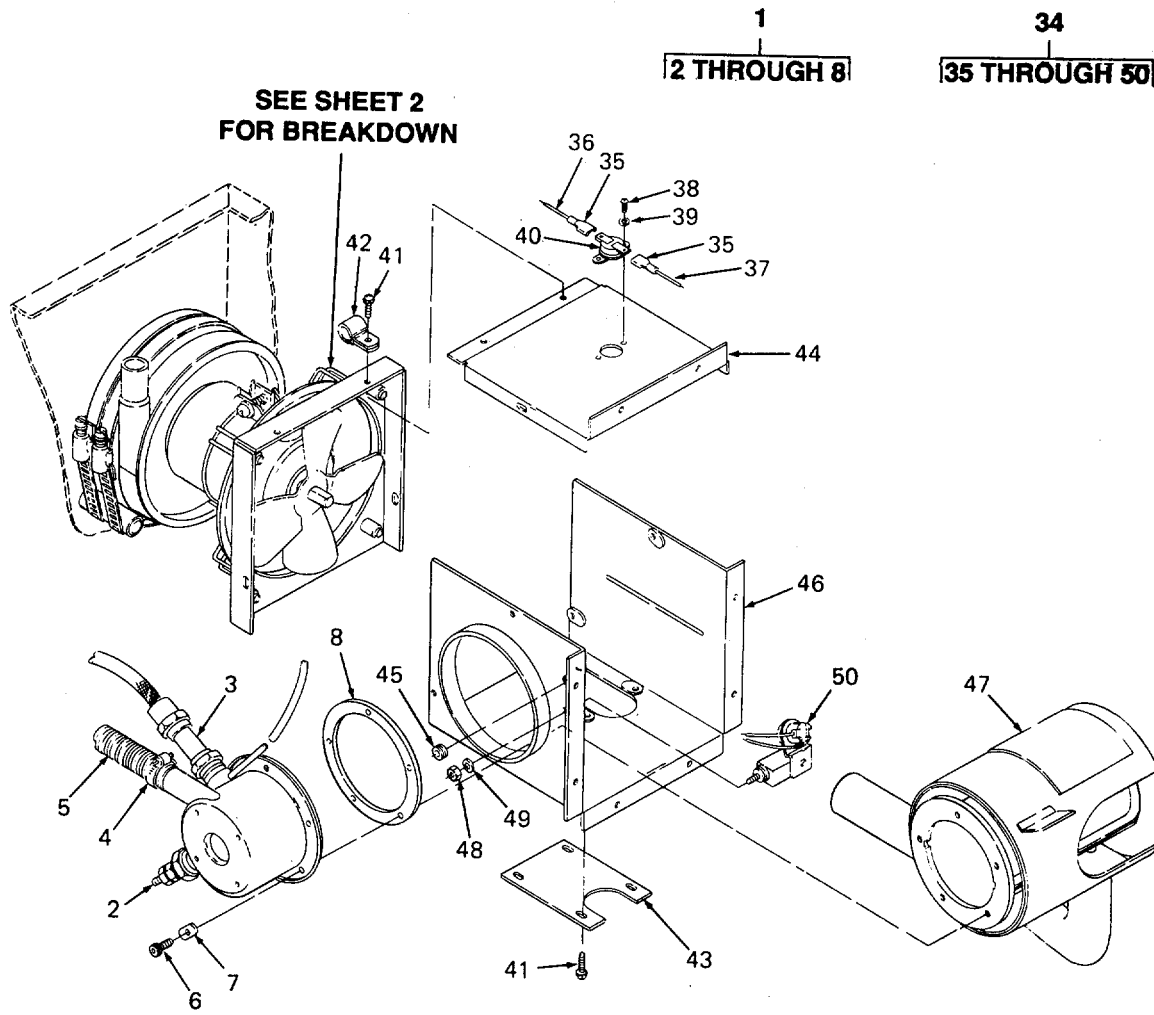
Burner Head, Blower Motor/Vent Assembly, and Heat Exchanger (Sheet 1 of 2)
